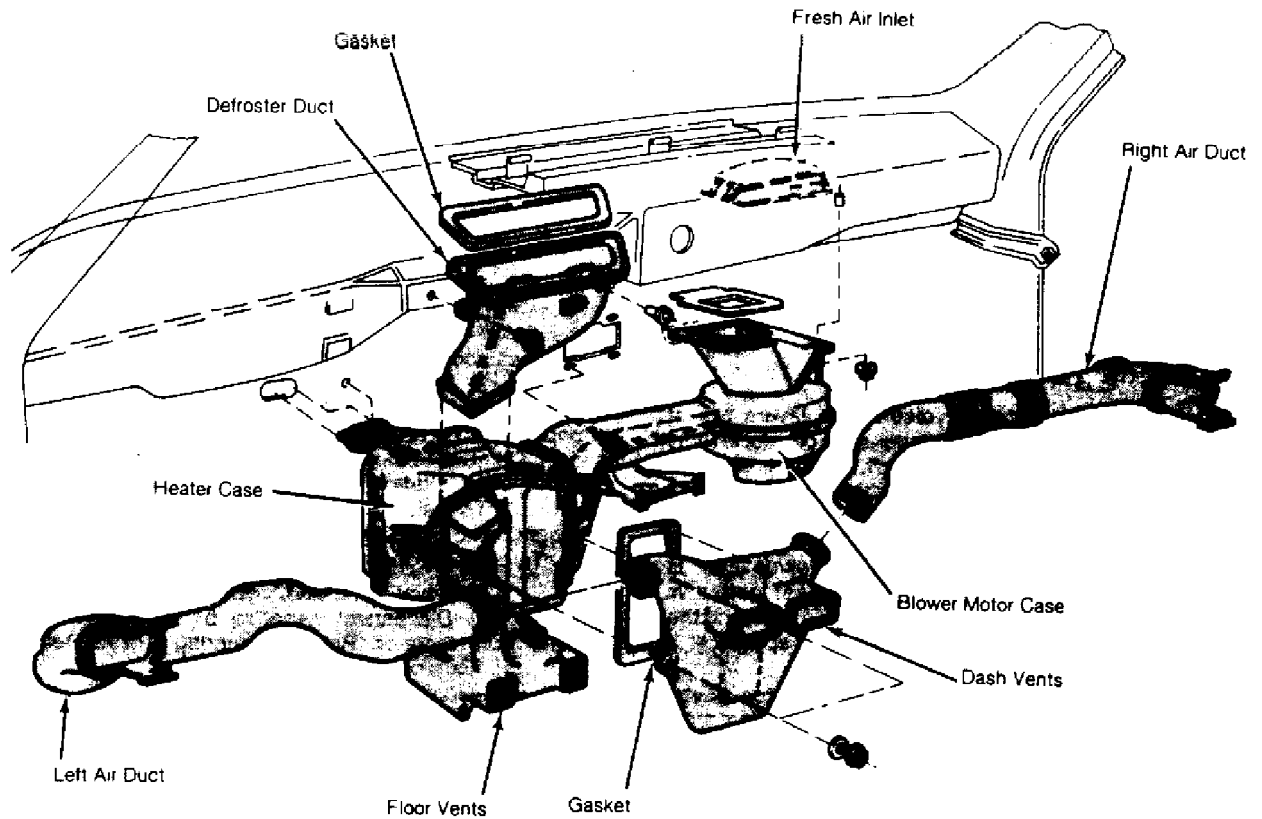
Exploded View of Heater System (Golf, GTI & Jetta)
